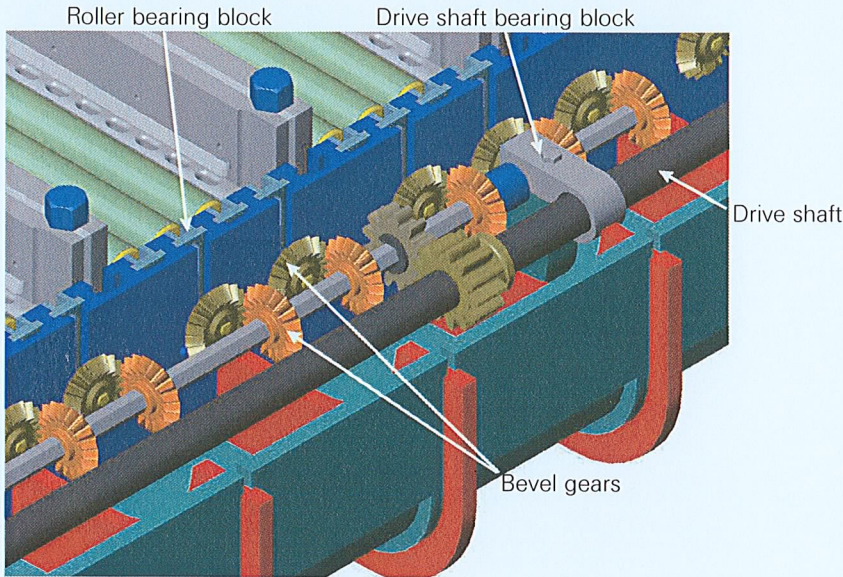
Roller Drive System - Note: Upper rollers are removed for clarity.
